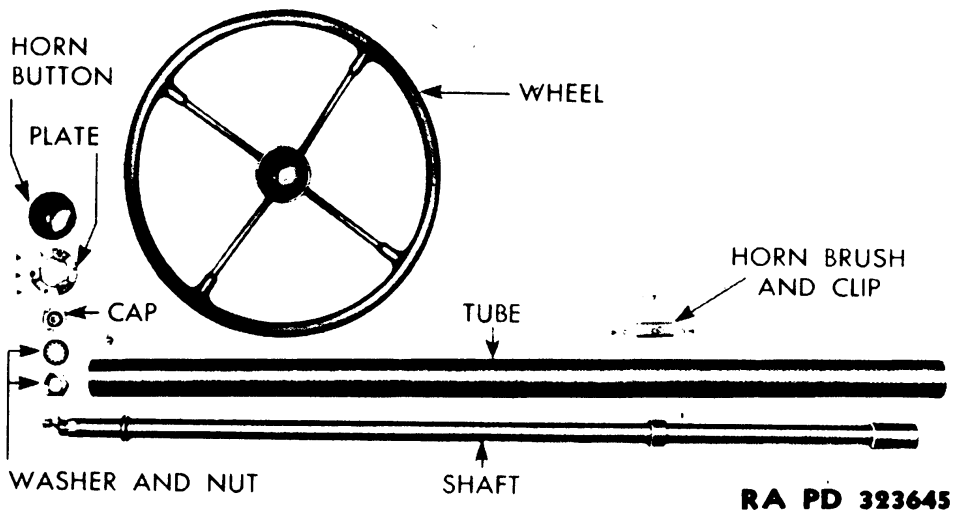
Steering Wheel Shaft and Tube Disassembled
